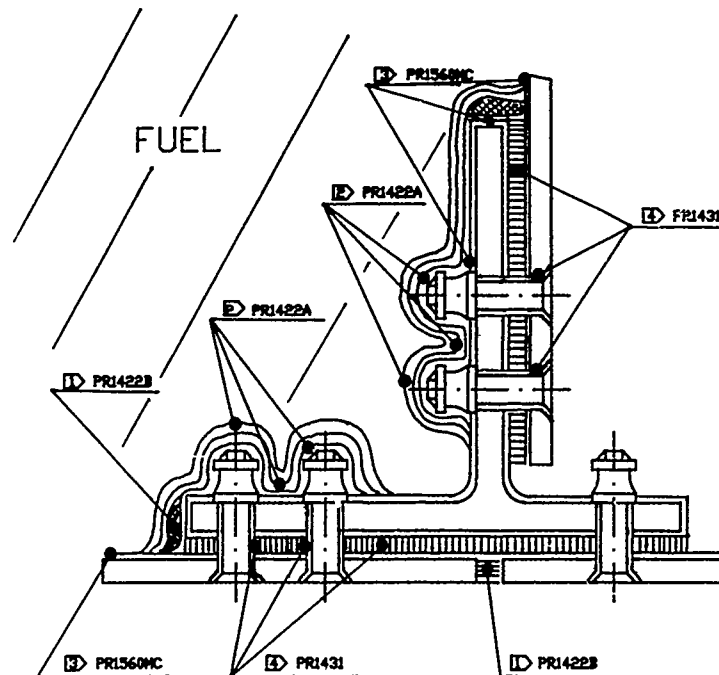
WING INTEGRAL FUEL TANK SEALING METHODS
